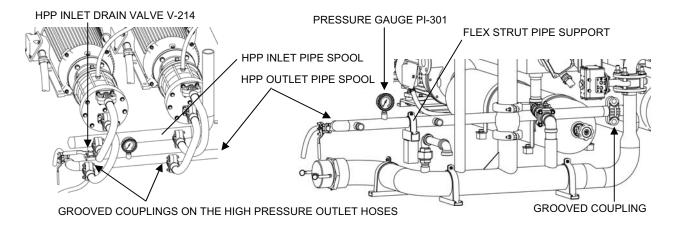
High Pressure Pump Outlet Pipe Spool Installation.
